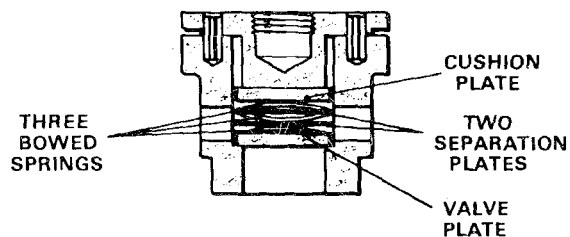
TC/R80 IMPROVED 4TH STAGE VALVE USING BOWED SPRINGS
